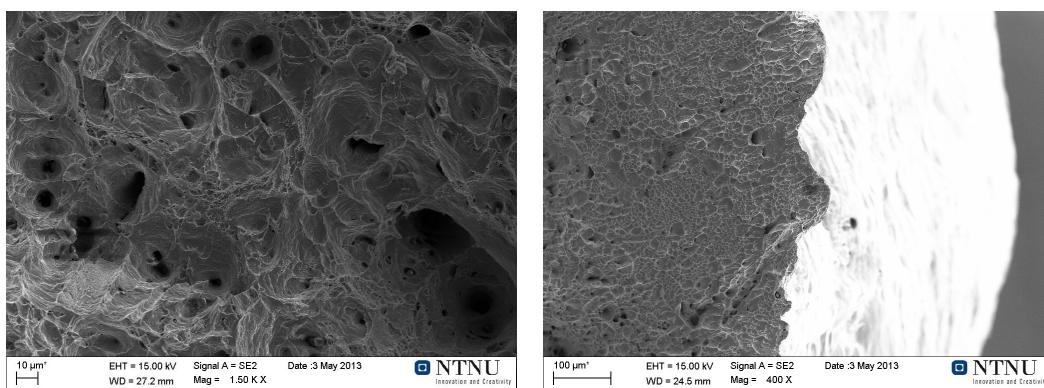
SEM images show the fracture surface from the tensile testing sample of HIP material.
